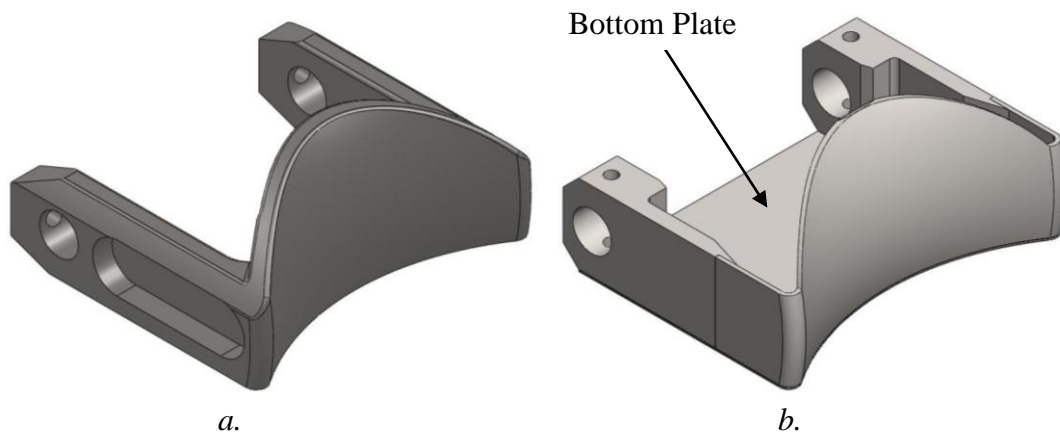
SCT Valves – a. As-Built Exhaust Valve. b. Spun Sheet Metal Exhaust Valve.
